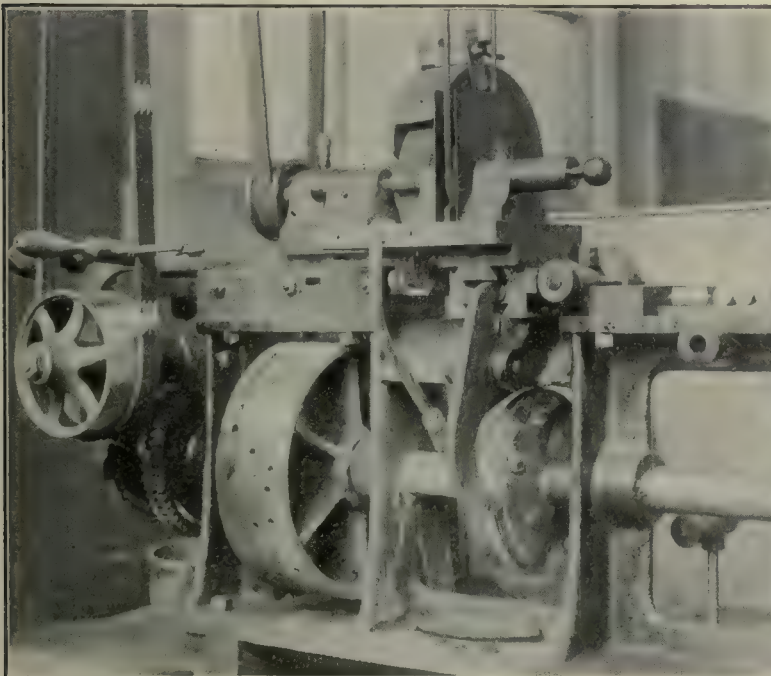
GRINDING PAPER FEED ROLLS ON AN AUTOMATIC SCREW MACHINE
